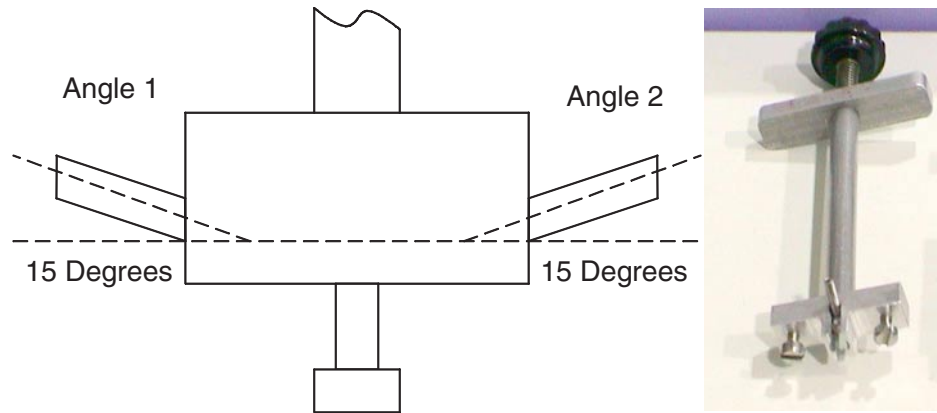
16 Slice Flex Removal Tool Pin Pitch
